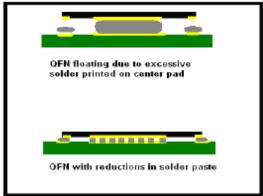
QFN Floating and QFN Stabilized with Solder Paste Reduction
